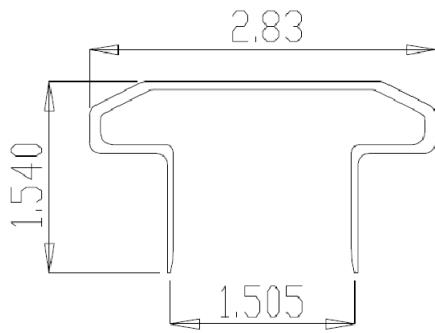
GUARDRAIL COMPONENT PROFILES
